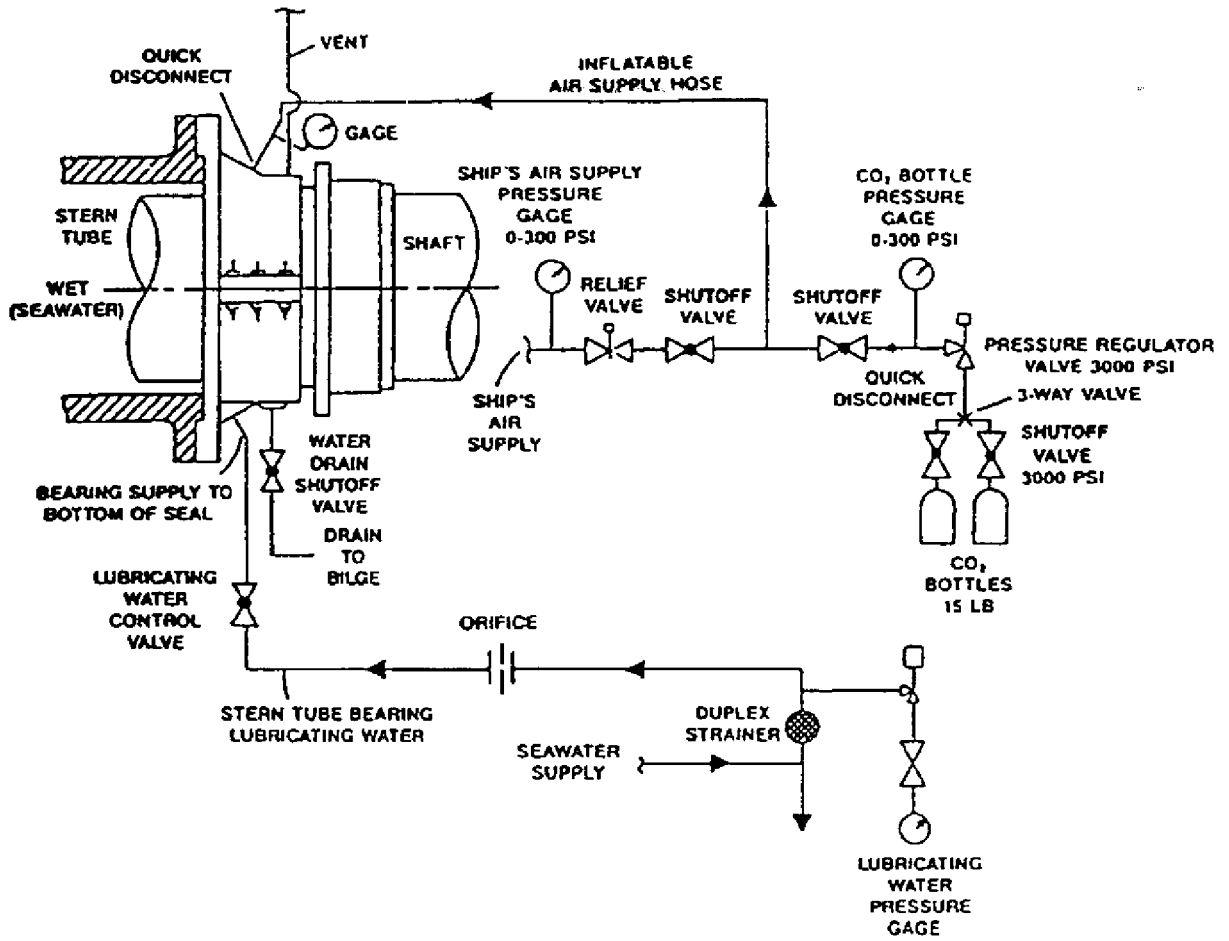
Typical Sealol Seal Air and Water Piping Arrangement
